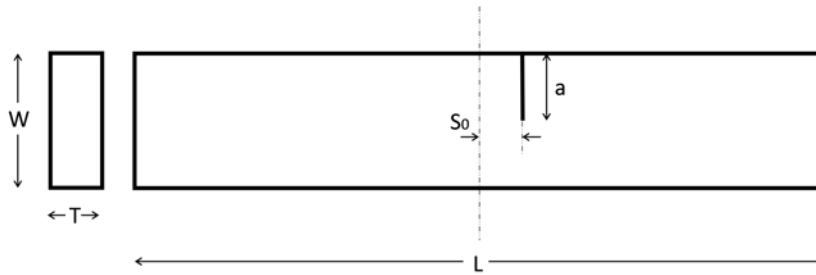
Cracked four-point bend (FPB) specimen showing dimensions $L \times W \times T$, initial crack length a and geometrical parameter S_0 .
